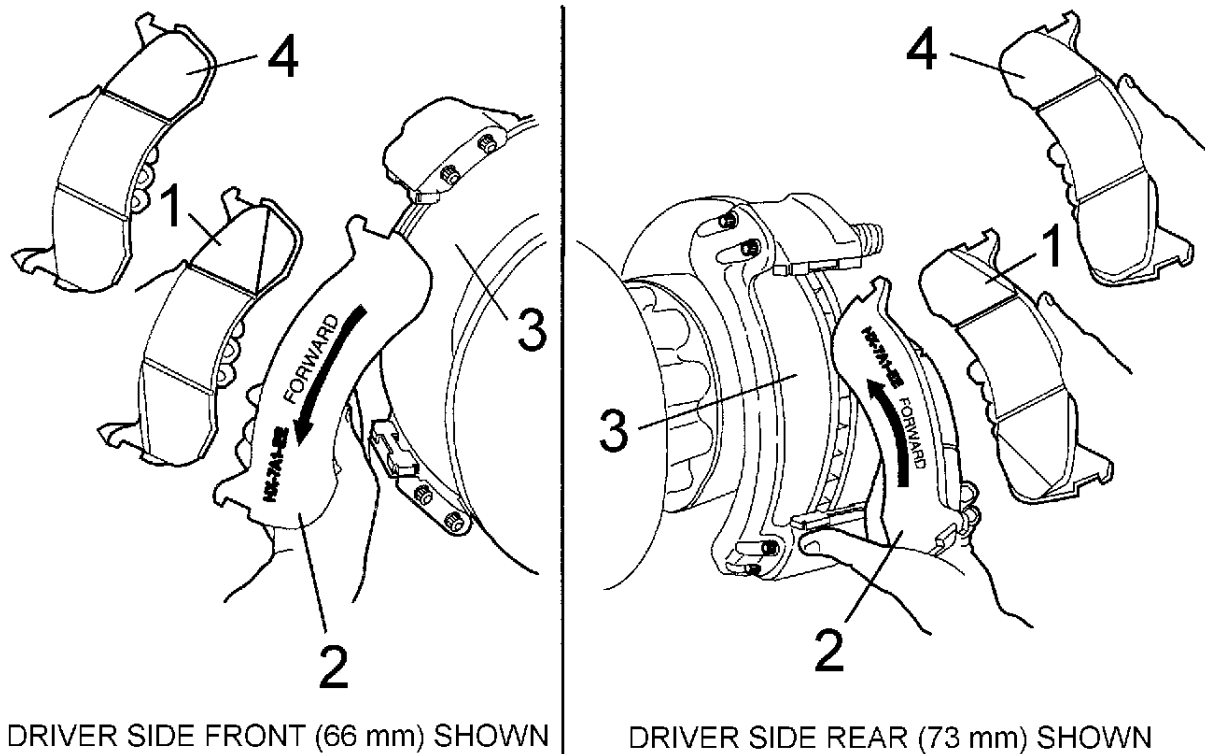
HX-7A1-EE Disc Brake Pads with FORWARD and ARROW Markings Show Forward Rotation Direction of Rotor
